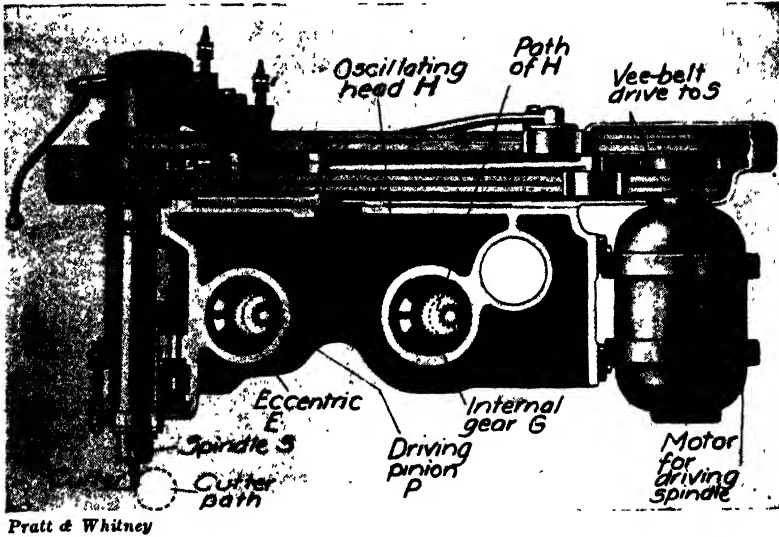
Section of Oscillating Head of Universal Die-sinking Machine.
